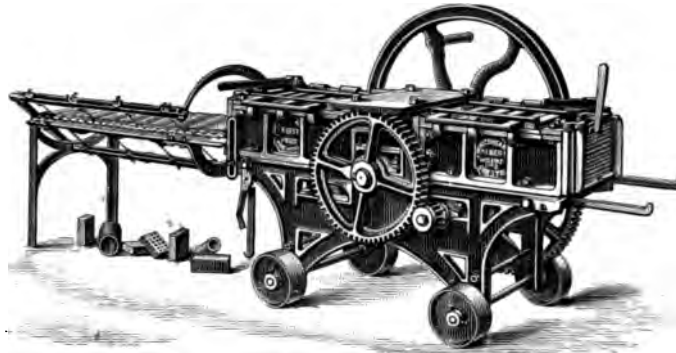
Piston Expression Machine, worked by Hand (Whitehead).
